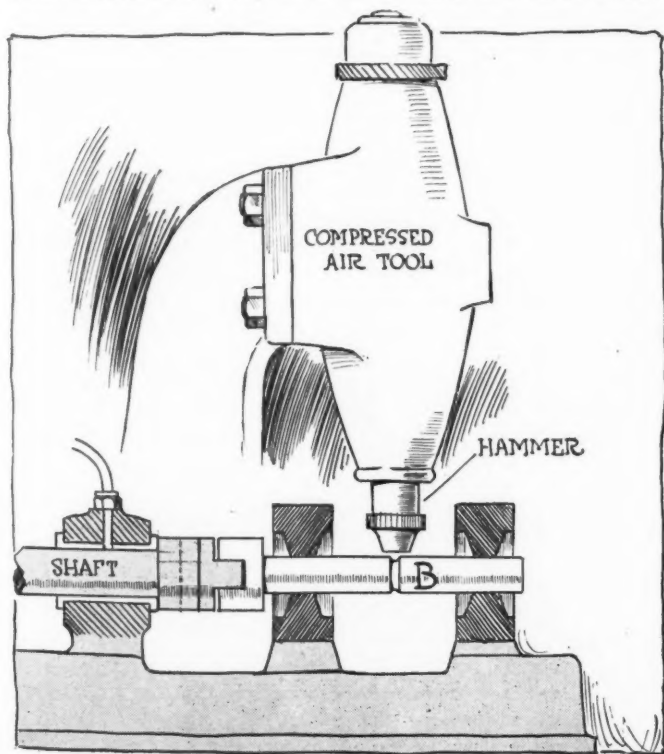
Compressed air tool for use by workman in shop testing of steel to get reliable and quick results
